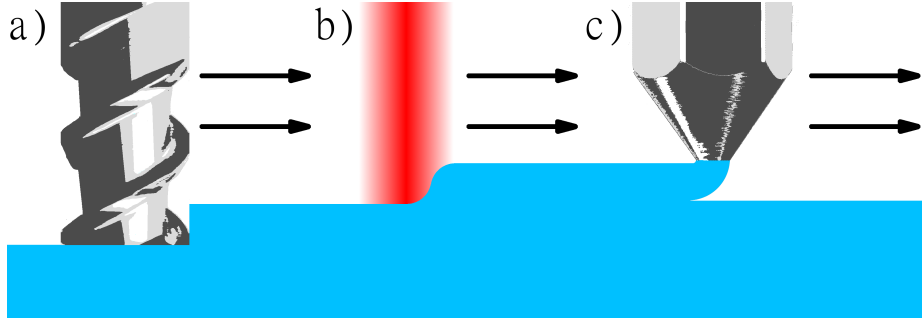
Methods for direct fabrication of LoC devices. a) Micromilling works by removing material by the use of a milling machine cutting away the substrate. b) Laser ablation removes the substrate by high intensity laser power. c) 3D printing adds on material, gradually building up the device.
